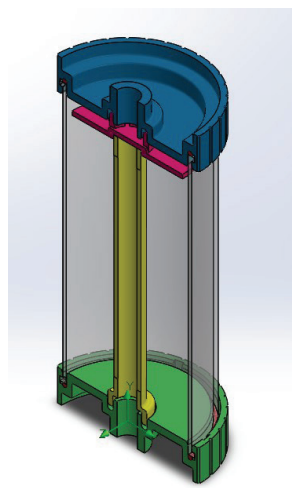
Column Filter Design; Components: blue - top cap, green - bottom cap, clear - side wall, yellow - core, pink - core barrier, red - O-rings/gasket
